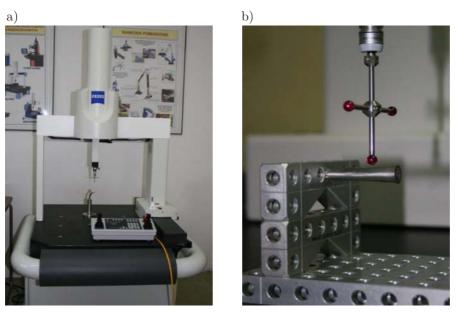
a) The Carl Zeiss measuring machine; b) the sample shape measuring process [2].
